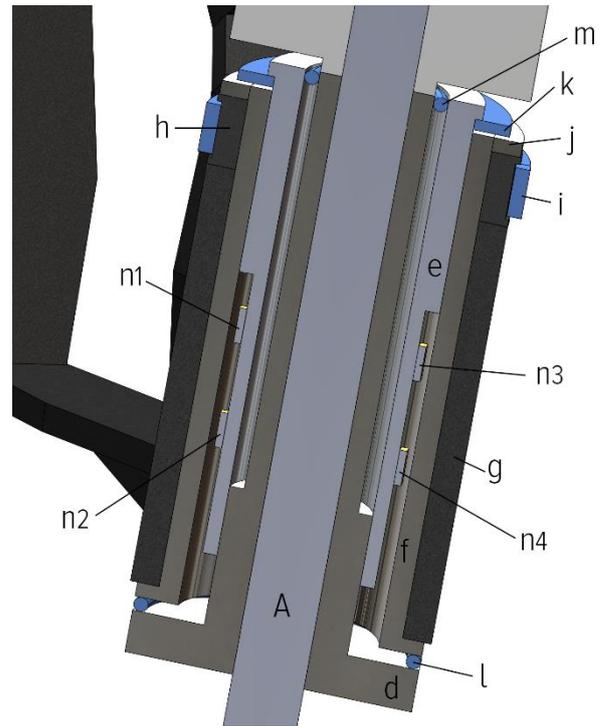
Section view of the instrumented gate (B) to show the four tubes (d) (e) (f) (g), the four strain gauges (n) and the pin (A) centered.
